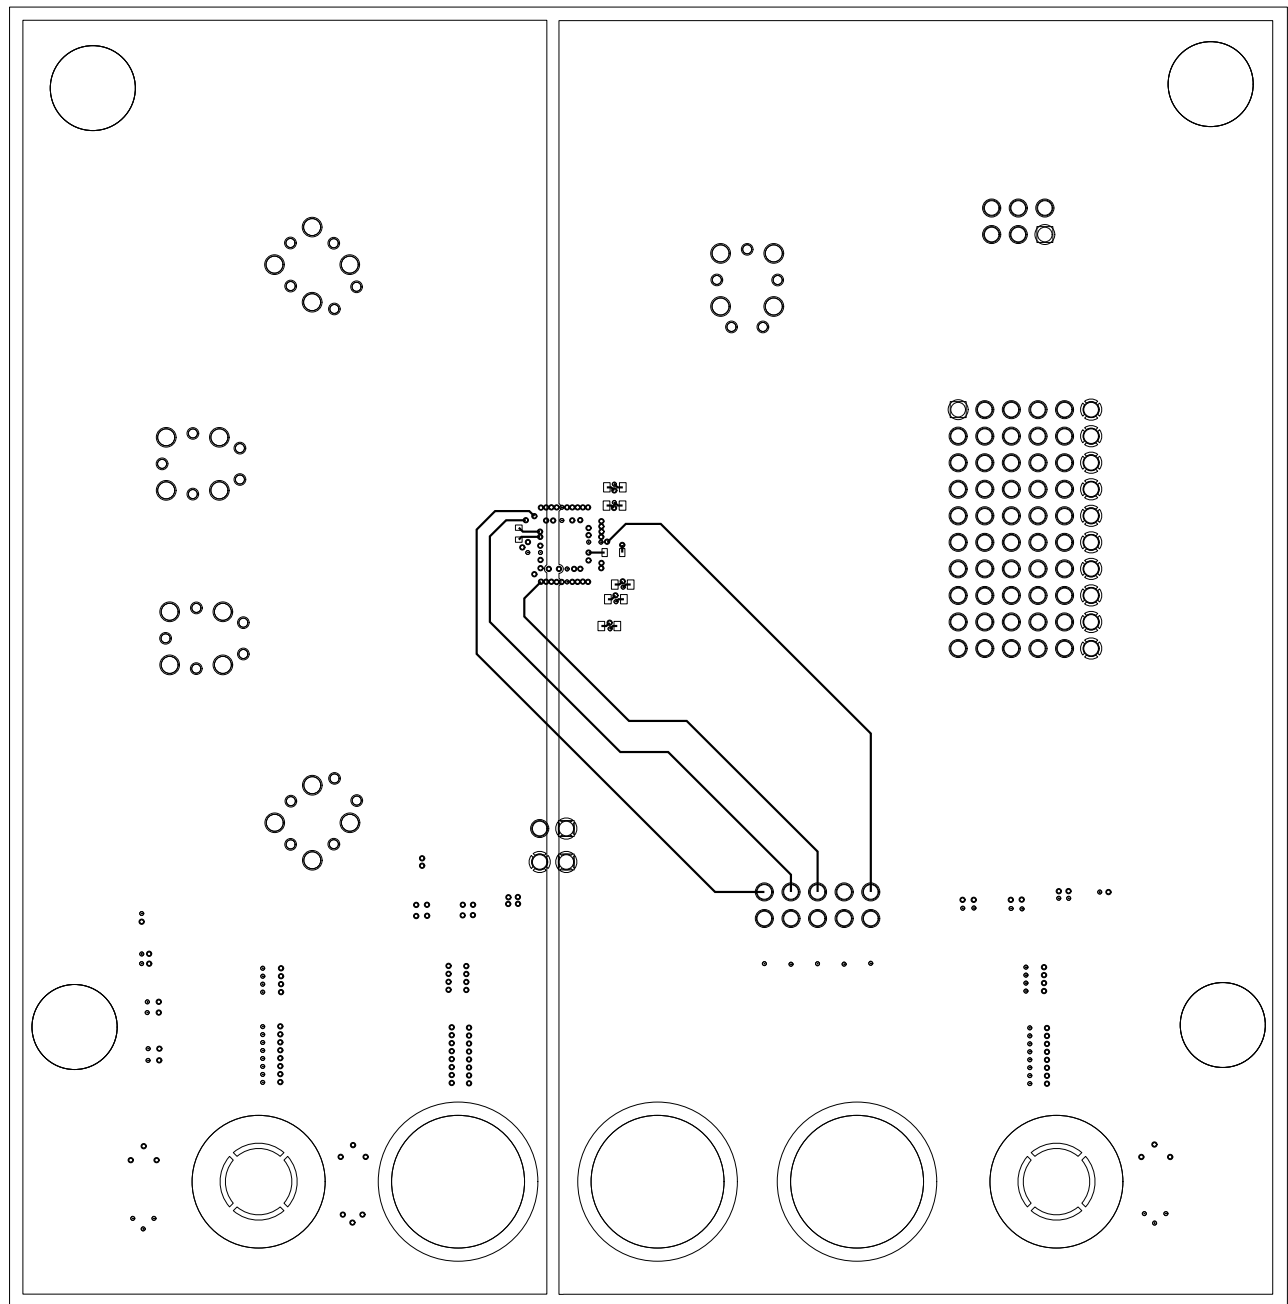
TLK1221 Board Layout: Bottom (Layer 10)
